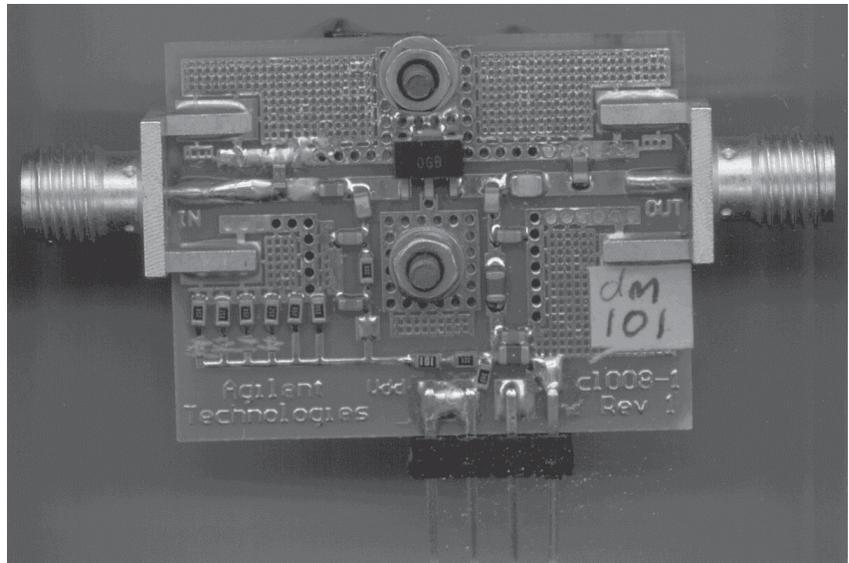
Fully assembled demoboard with connectors and screws for heatsink
